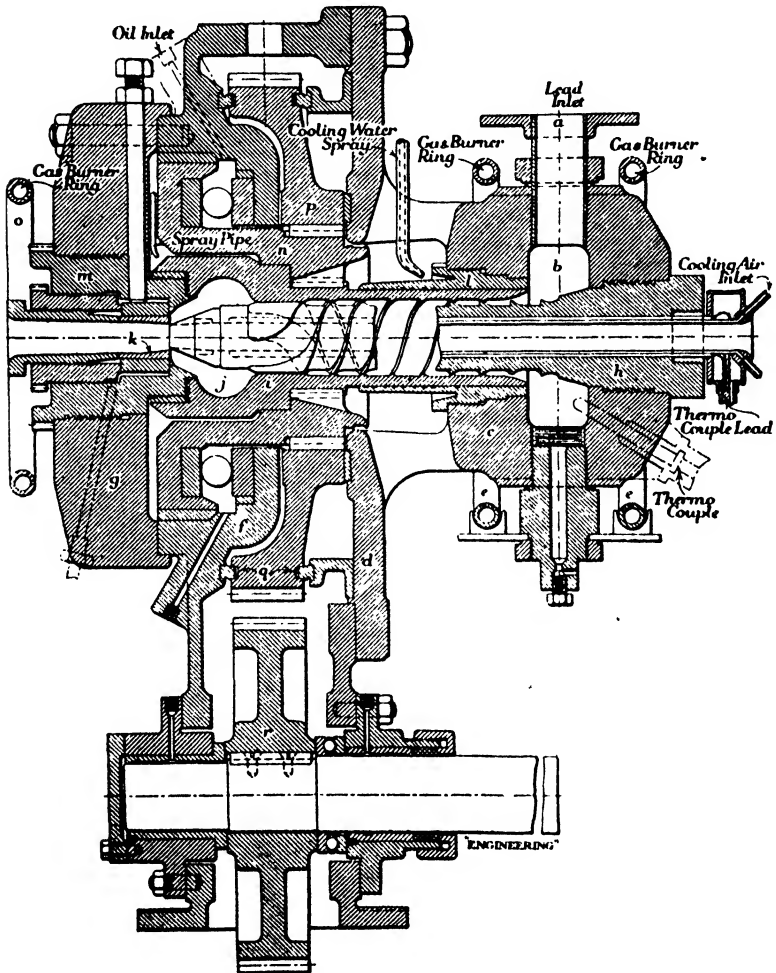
Diagram of the Henley continuous extrusion machine.
